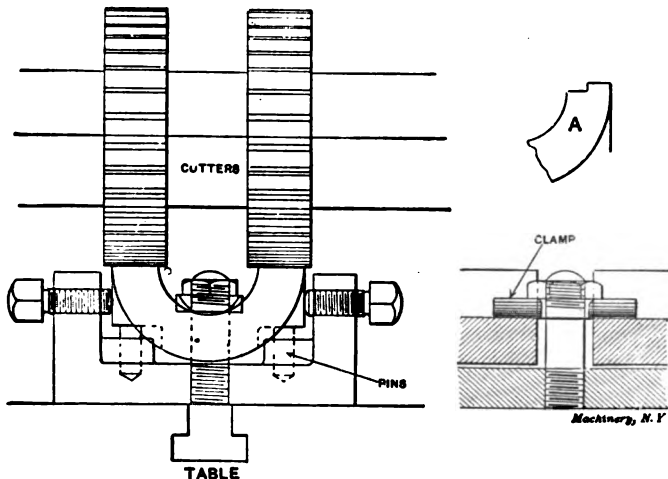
Simple Fixture for Milling Cap for Bearing.
